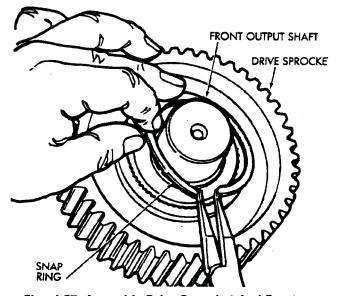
Assemble Drive Sprocket And Front Output Shaft
